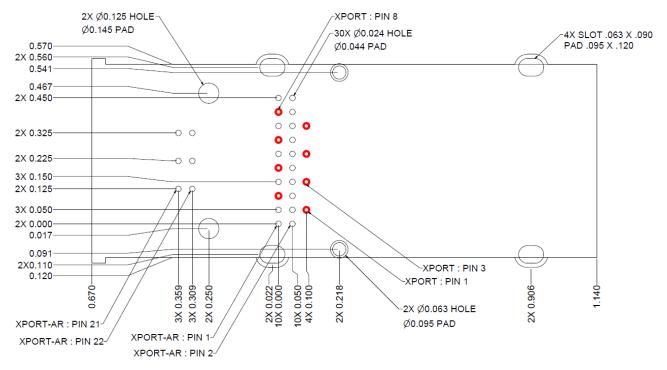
Hole Pattern and Mounting Dimensions (Bottom View)
